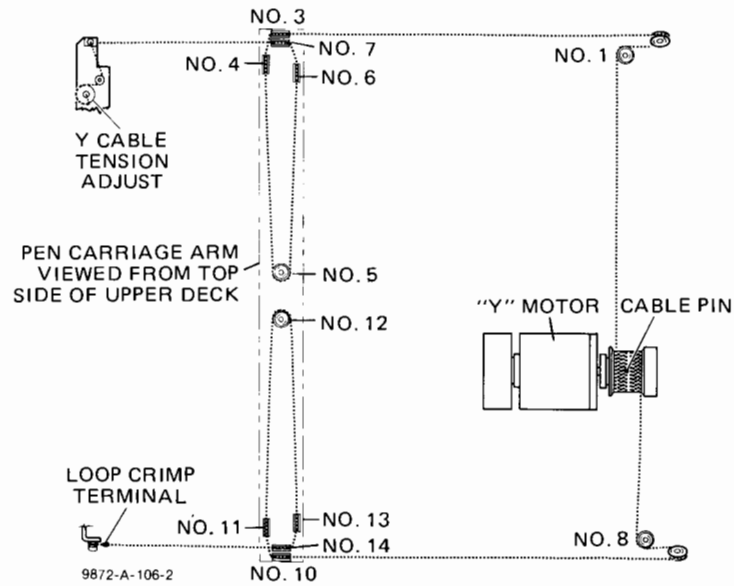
B. Y-Axis Drive Cable Stringing Diagram
